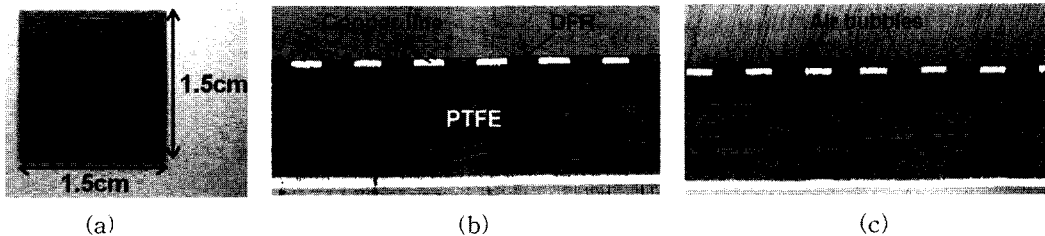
Images of (a) PTFE test board and cross section of DFR-laminated test board with (b) no air bubbles, (c) air bubbles captured.
